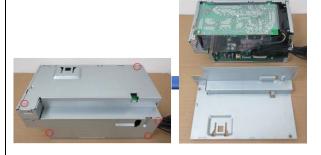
Remove the stand-off & Mylar from PCBA by hand-pulling. Use tool to unscrew three screws to loosen EMI board.
